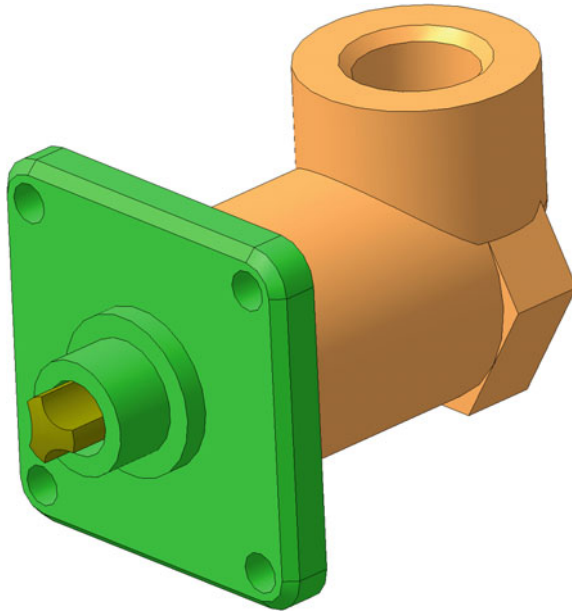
Valve pneumatic apparatus (assembly view)
